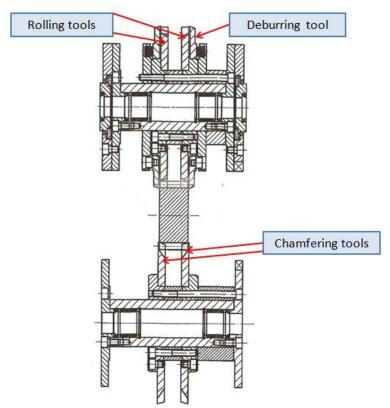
Group of chamfering tools and head with rolling an deburring tools
